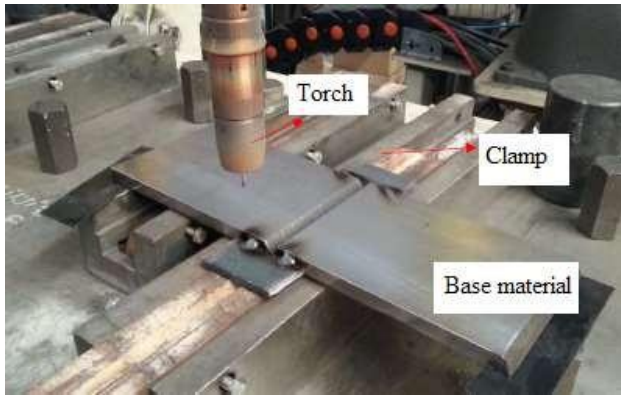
Welding procedure – Residual stress measurement sample
